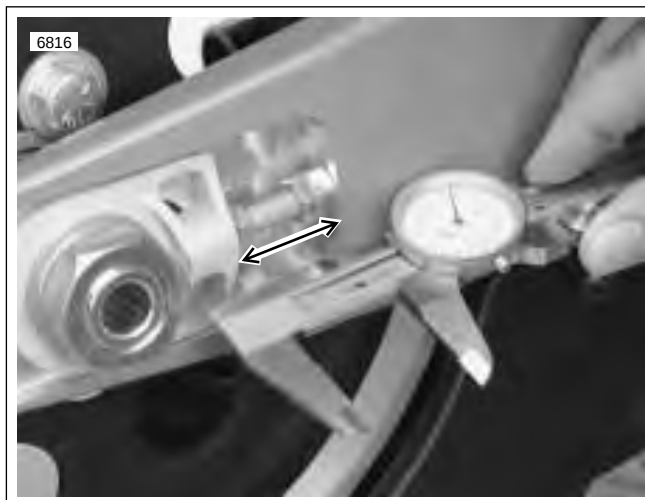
Checking Rear Wheel Alignment, Right Side Shown
